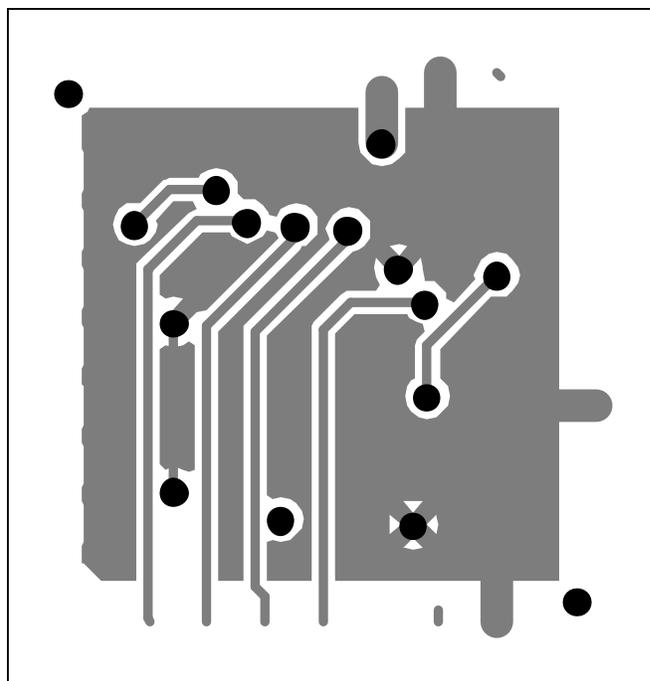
MAX21000 MInD EV Kit STAMP Board—Bottom View
